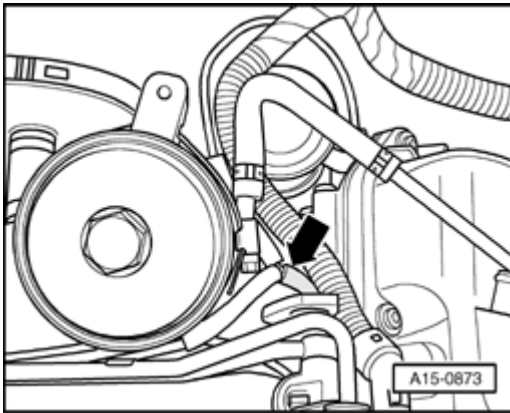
Disconnecting Vacuum Hose At T-Piece
